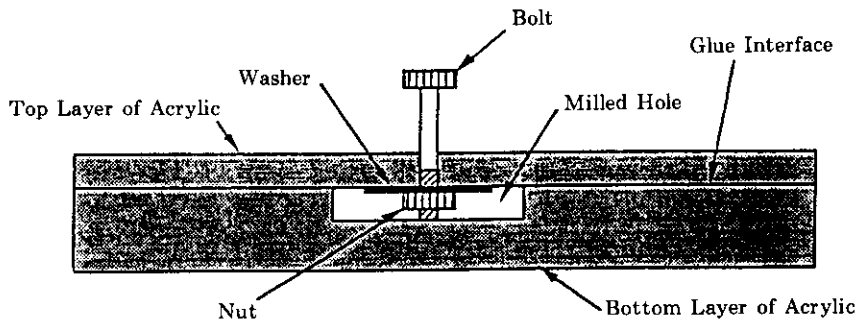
Sketch of wedge-opening bolt and nut arrangement
